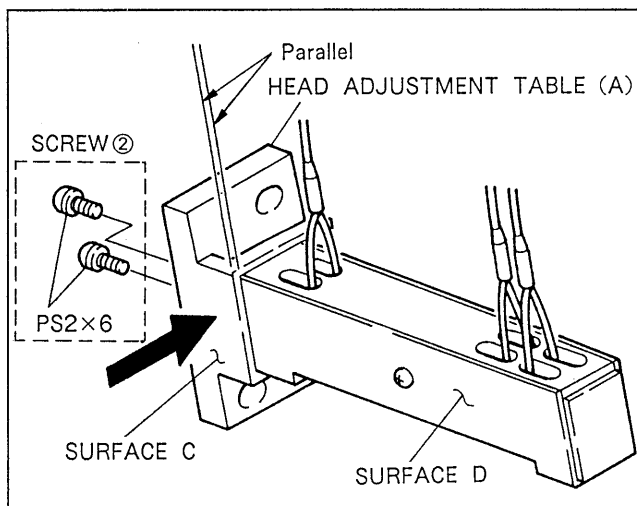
Erase Head Mounting Position Adjustment
